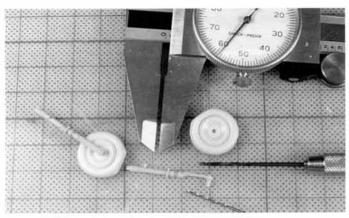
To get the correct diameter of the landing gear wheel stem, use calipers or a similar device to measure the diameter and then drill the appropriate size holes in the resin wheels. If you drill a bad hole, simply fill it with super glue, let it dry, and then re-drill.
